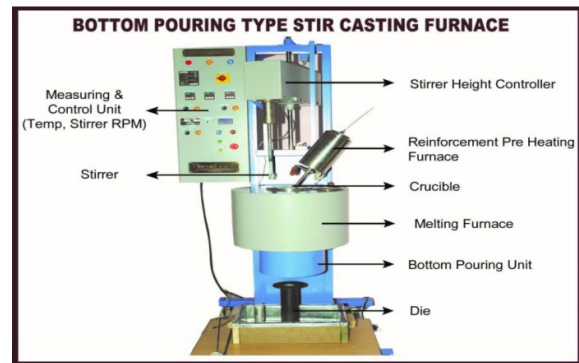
Bottom Pouring Type Stir Casting Furnace
